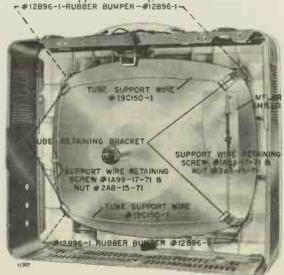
Rear View of Models using Chassis 15D1B with Chassis Removed. Method of picture tube mounting shown.
